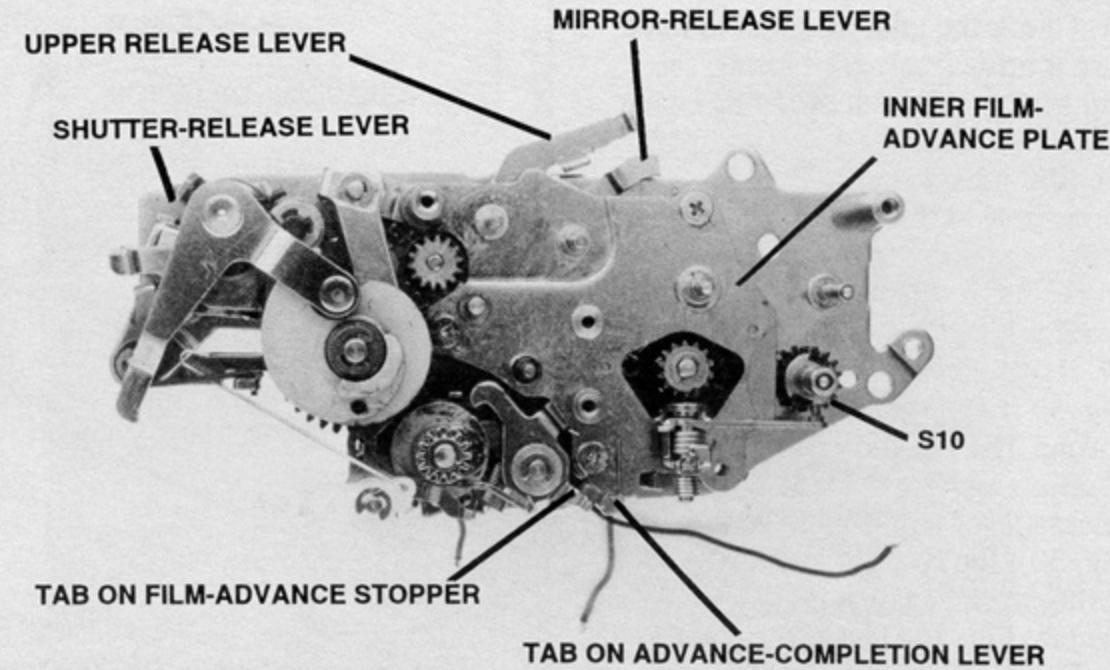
TOP OF FILM-ADVANCE UNIT, GEARS REMOVED
